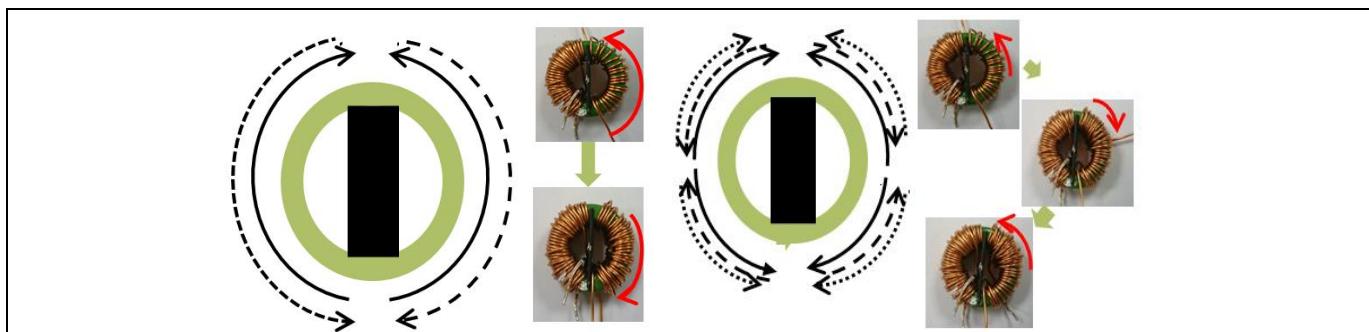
Traditional winding method for CMC (left); butterfly winding for CMC (right)
